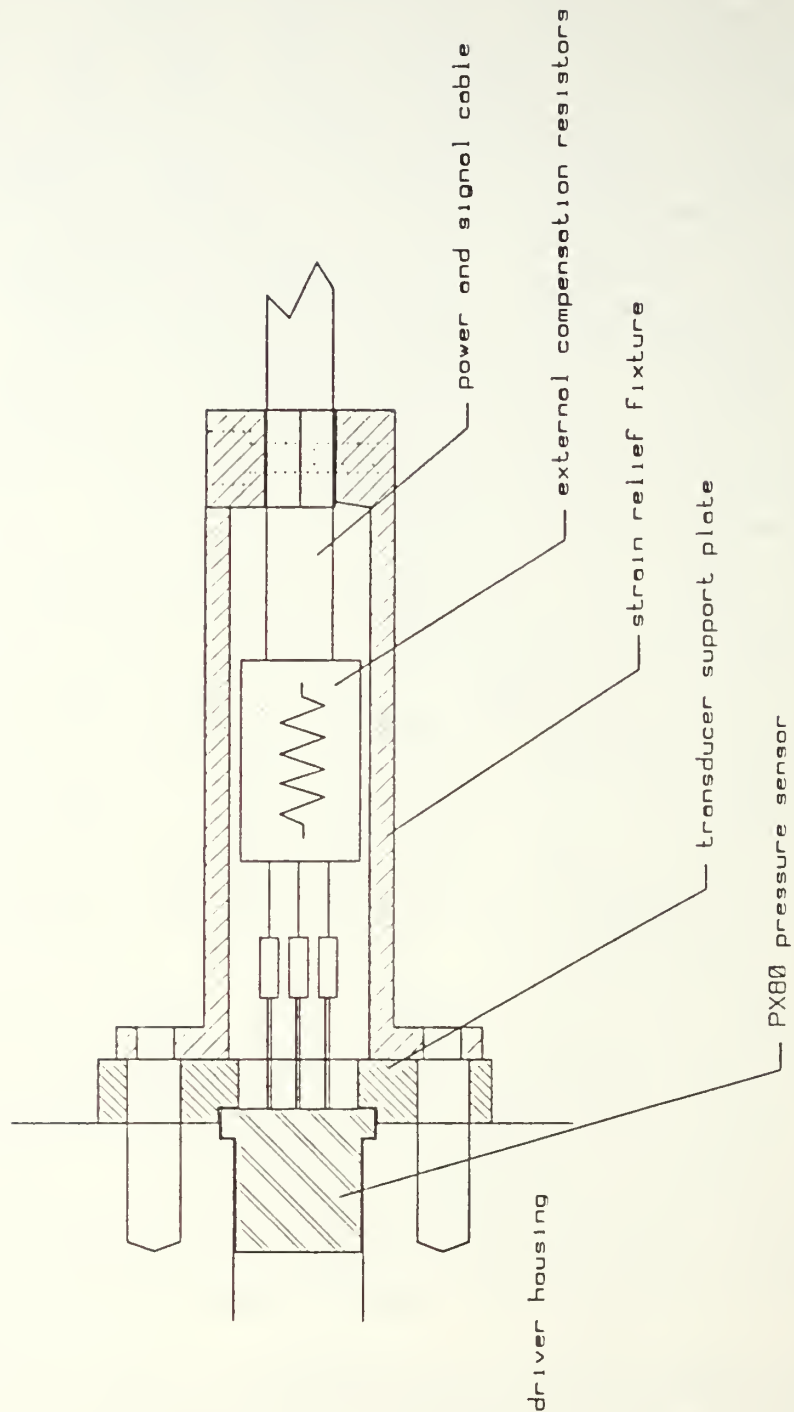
Schematic of the PX80 Pressure Sensor, Support Plate, and Strain Relief Fixture
